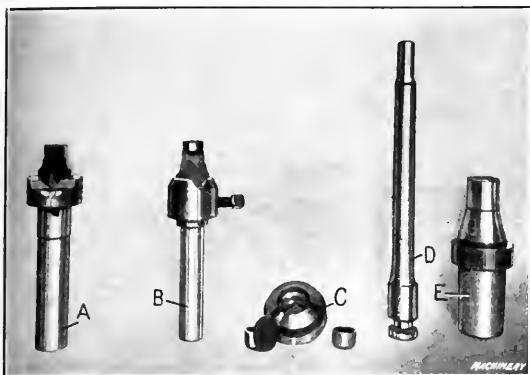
Combination Blanking, Cupping and Drawing Punch and Die, and the Tools used for making the Die
